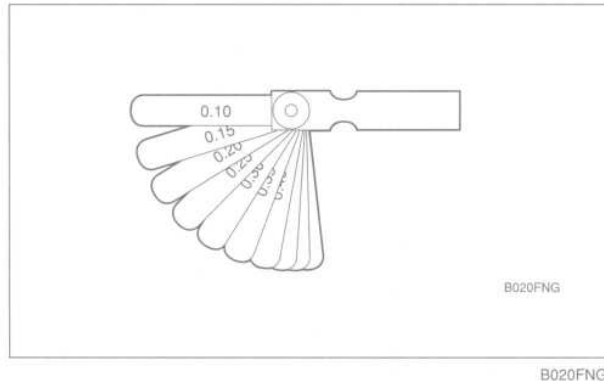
Feeler gauge set, used for precise measurement jobs, such as checking valve clearances.
